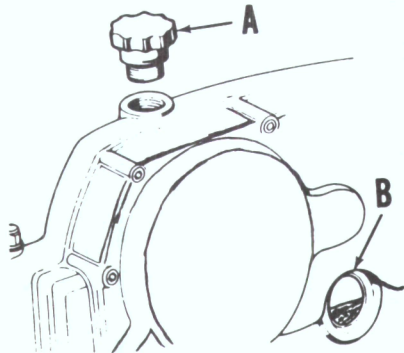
Remove plug (A) and fill crankcase with oil to level of gauge (B).
